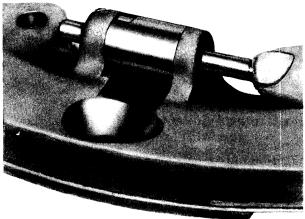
Forcing Dummy Shaft Out of Adjuster Sleeve
